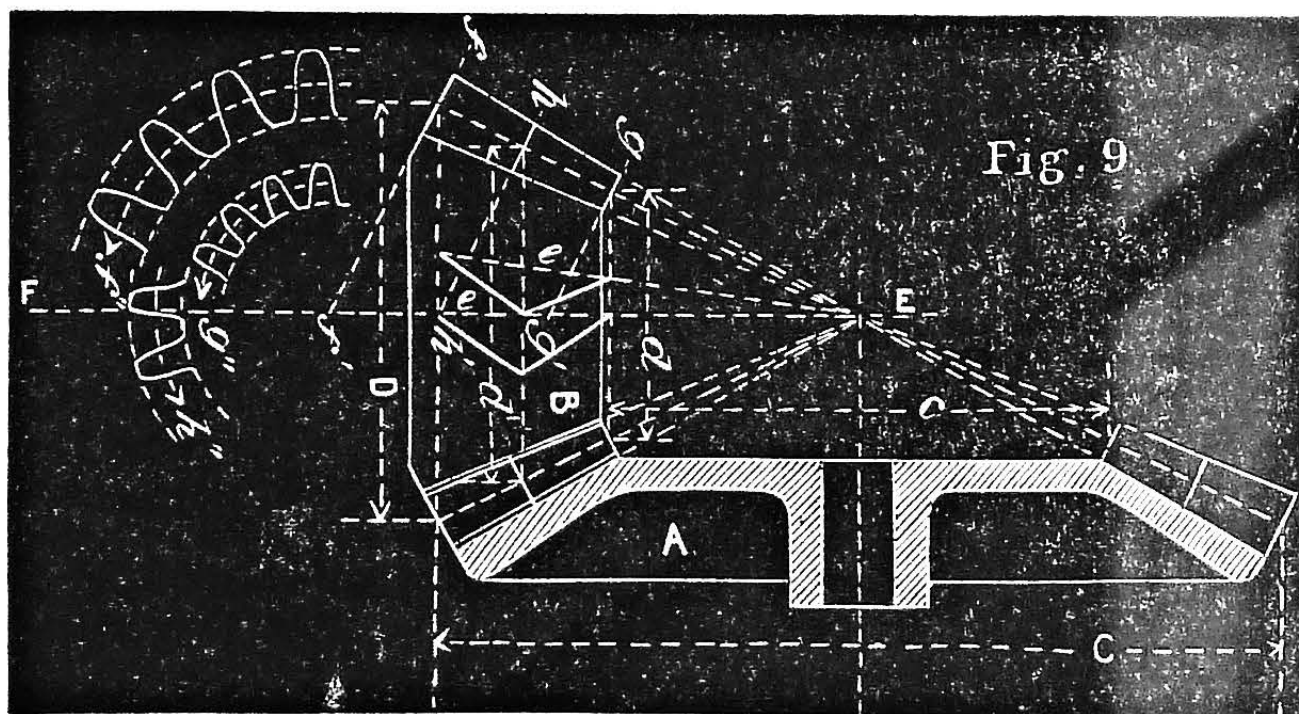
Diagram to illustrate the Elements of Bevel Helical Gears.
